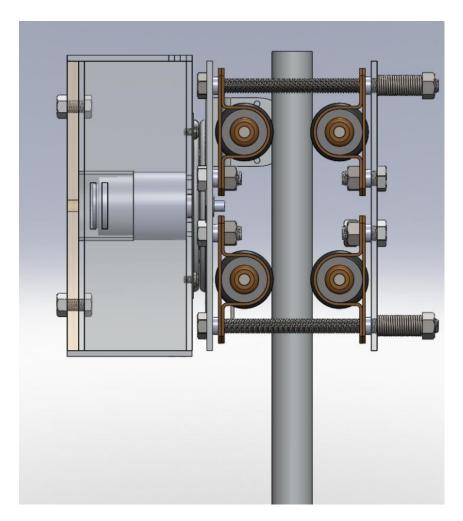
Assembly of Rotary Module, Translational Module, and Cane
